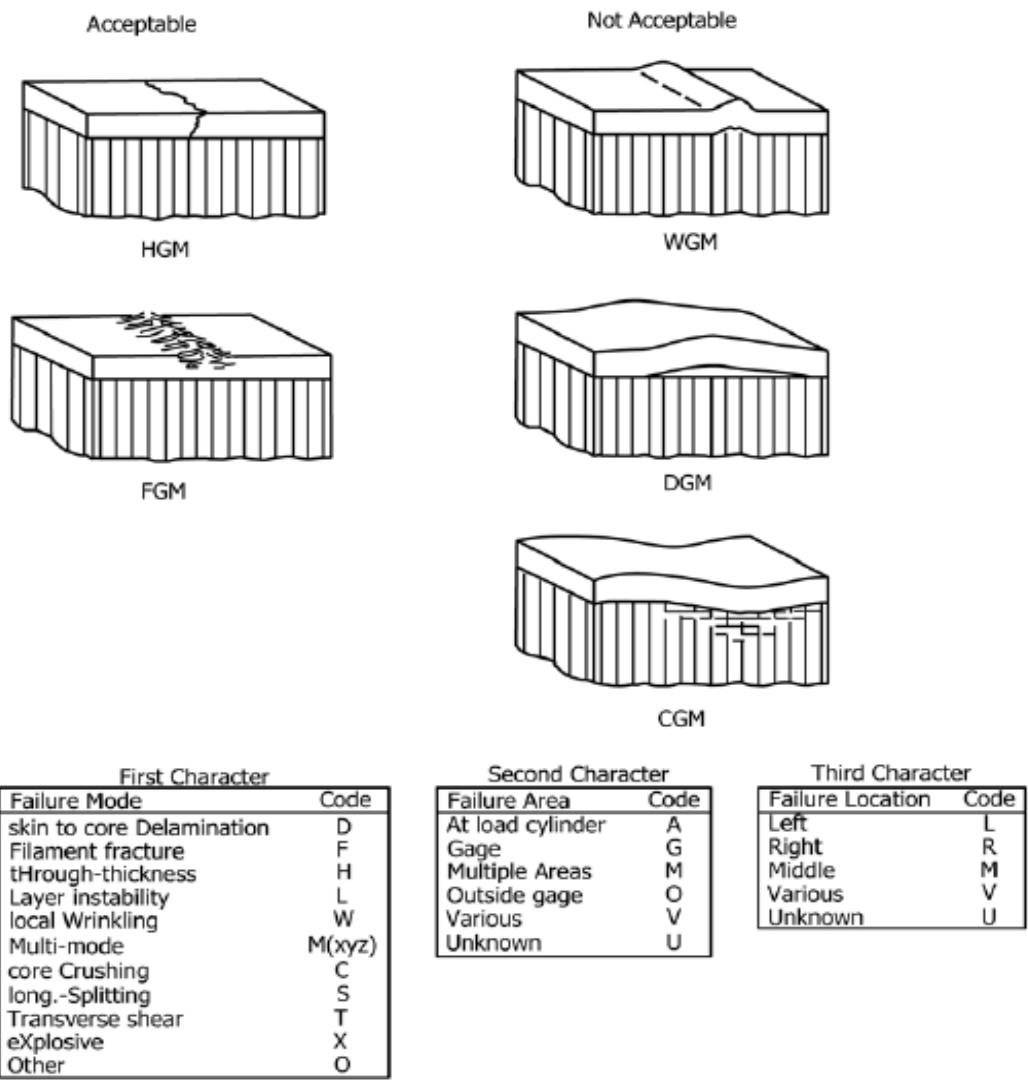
ASTM D 5467 – Sandwich beam test specimen failure identification codes and overall specimen failure schematics [49]
